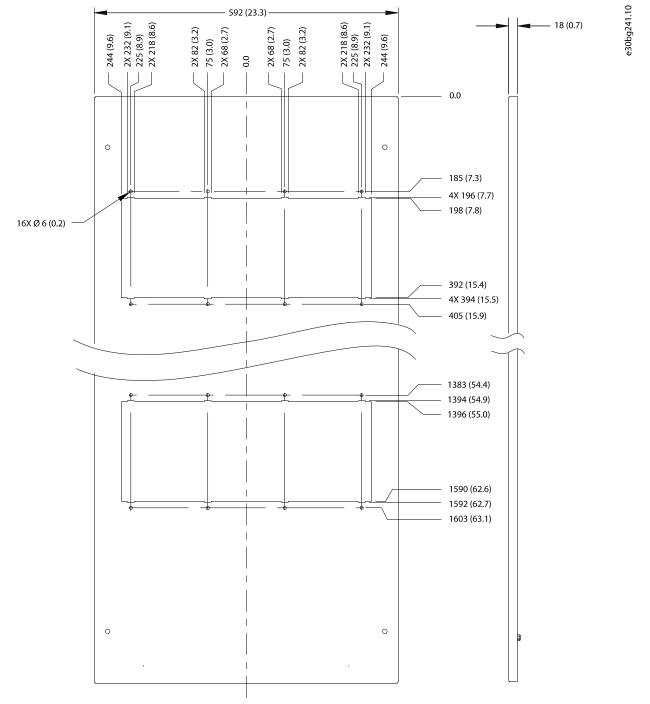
Vent Dimensions for Backplate in 600 mm (24 in) Enclosure
